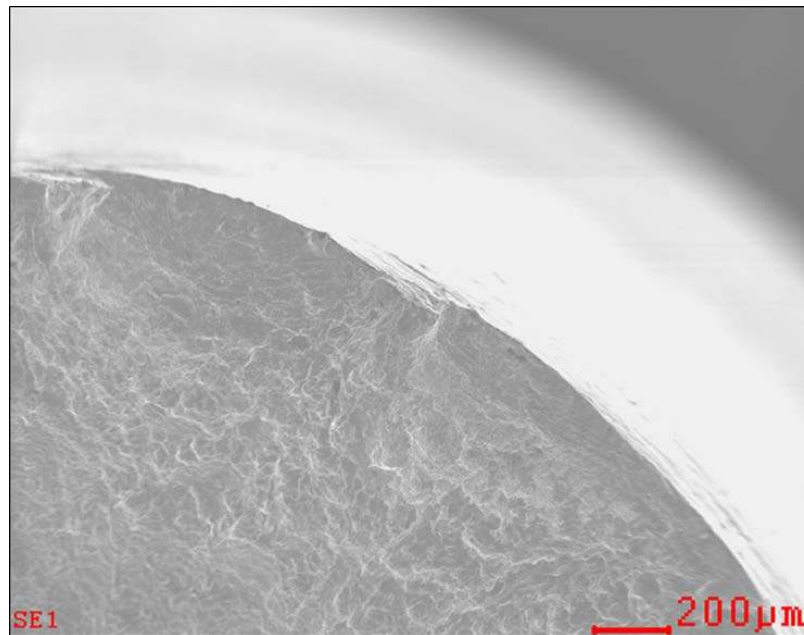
187.6 J/mm³ energy density 45° orientation fatigue fracture. Proposed final fracture zone indicated by transition to flat planar fracture surface lacking striations.
